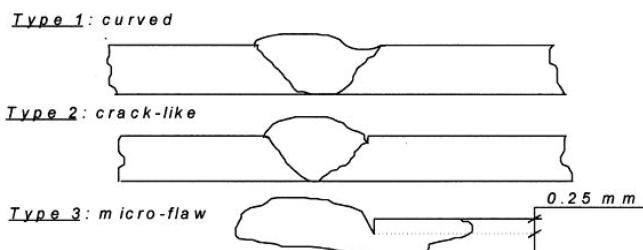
Classification of undercuts in the case of a butt welded joint, /9/.
